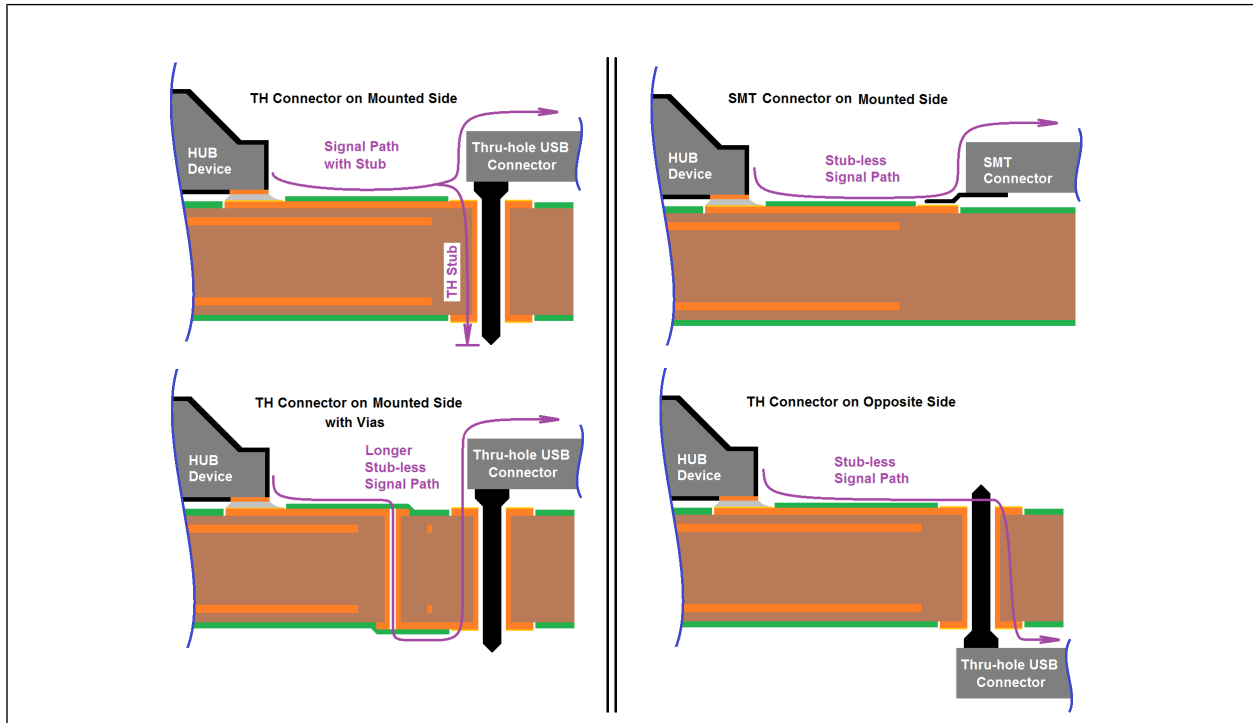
PCB Trace Paths to a Thru-Hole Connector
